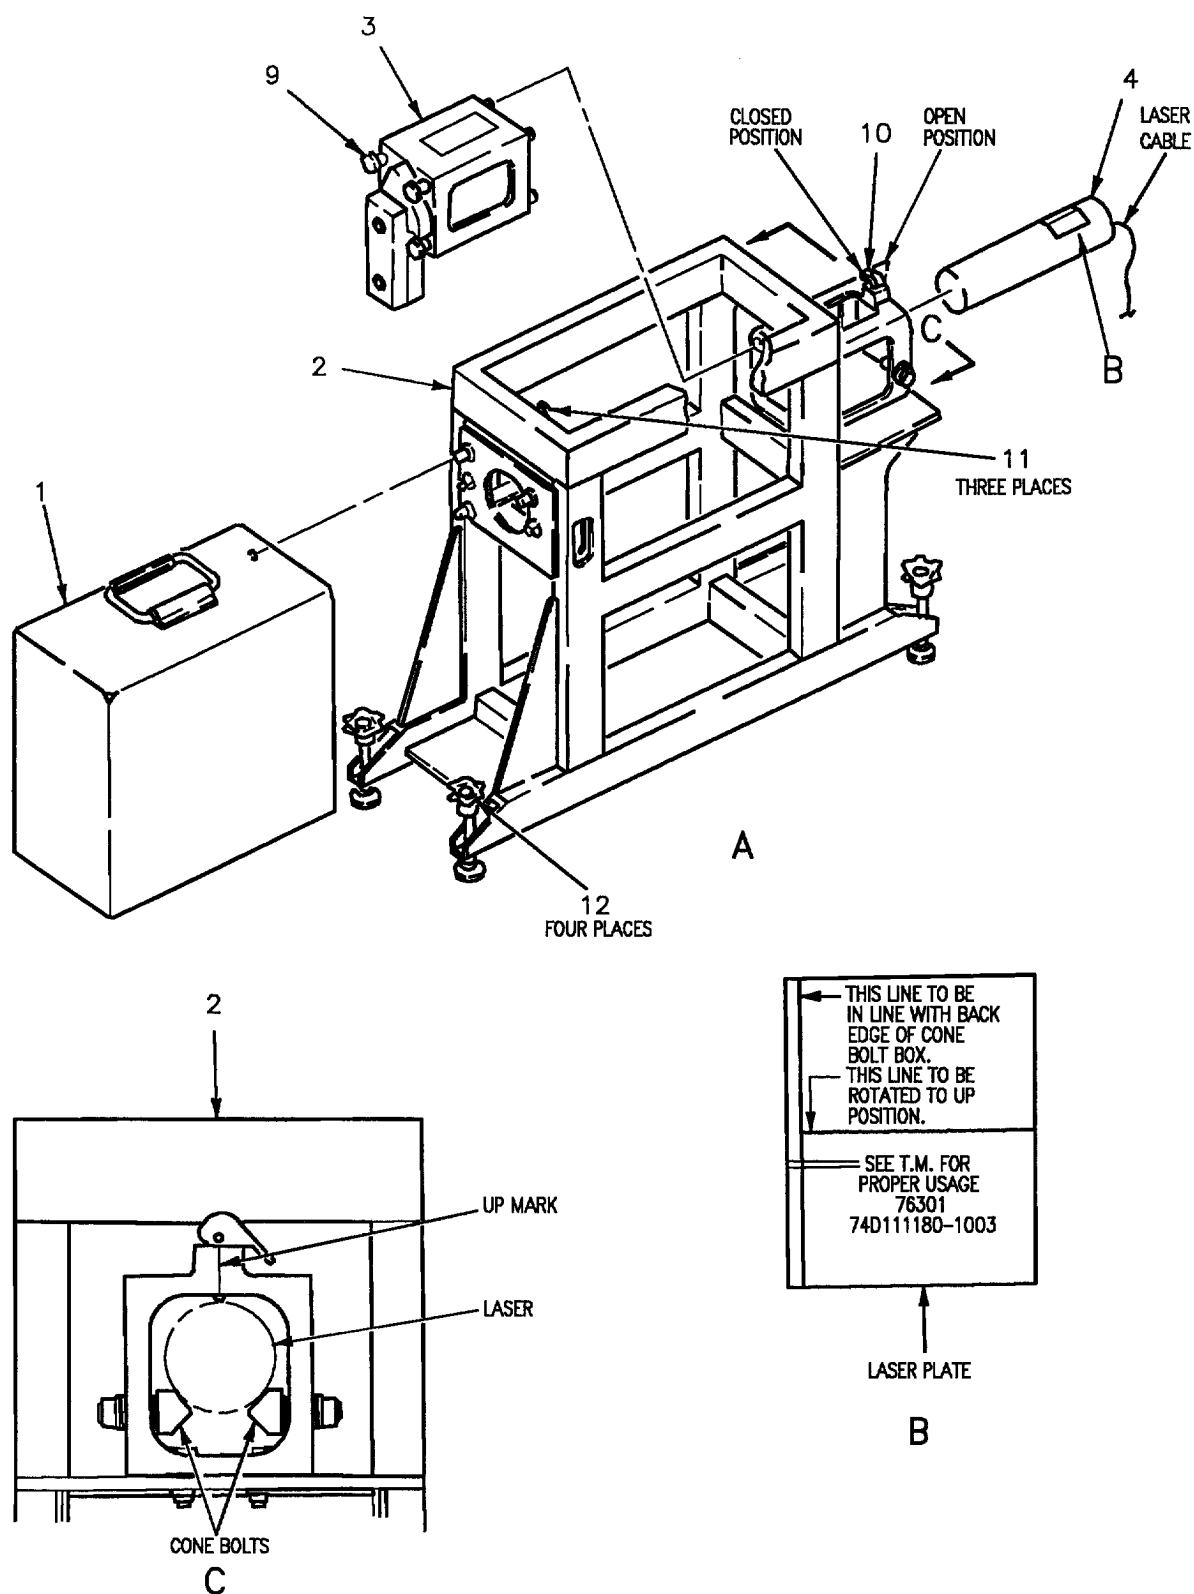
Triaxial Alignment Set Check Fixture (Sheet 3)
